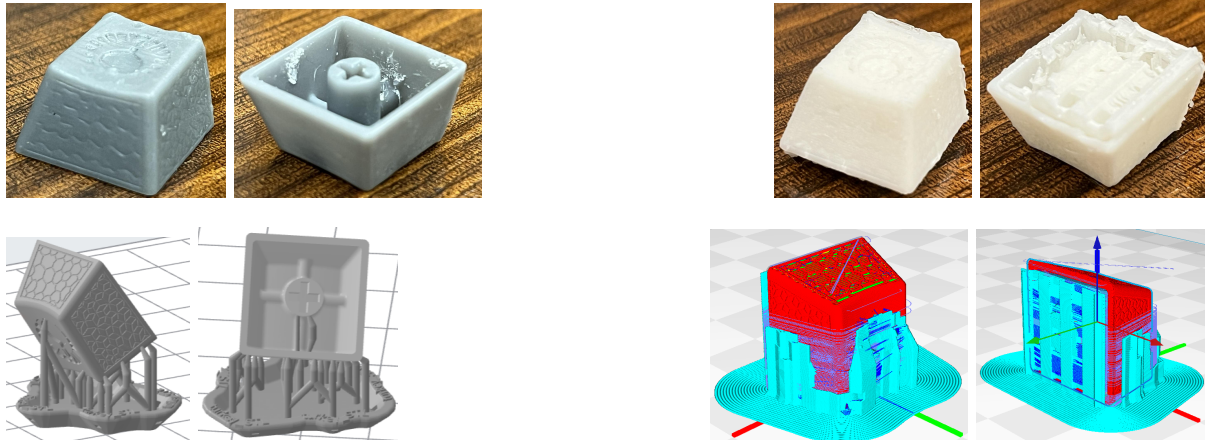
Form2 gray (left) and Dremel white (right) prints with their respective supports below. The Form2 SLA print captured far more detail than the Dremel FDM print.
